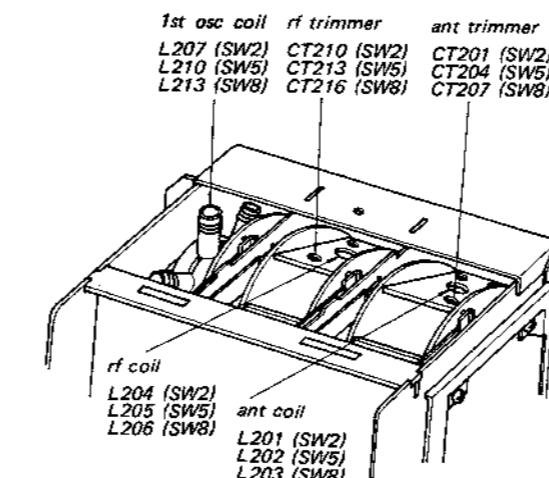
Adjusting parts for SW2, SW6, SW8
